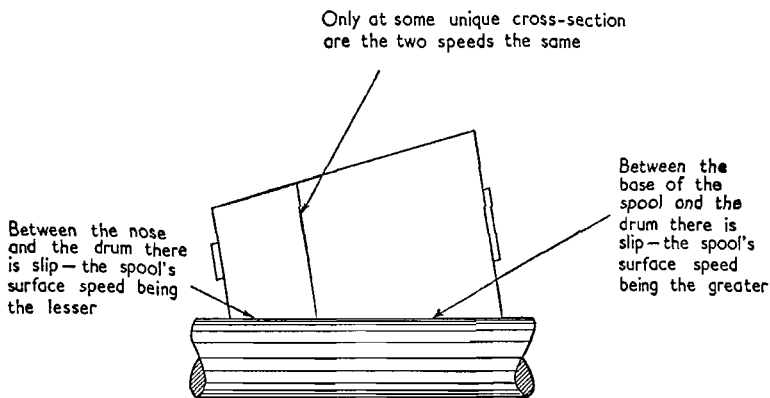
Slip encountered when driving a conical spool on a drum-type machine
